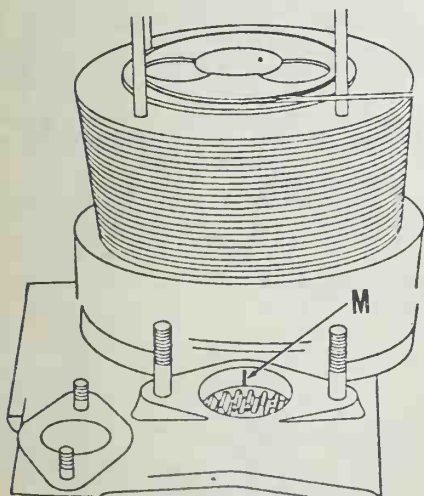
Camshaft gear mark on single-cylinder models must align with mark (M) in tappet housing opening in crankcase when piston is at top dead center.
